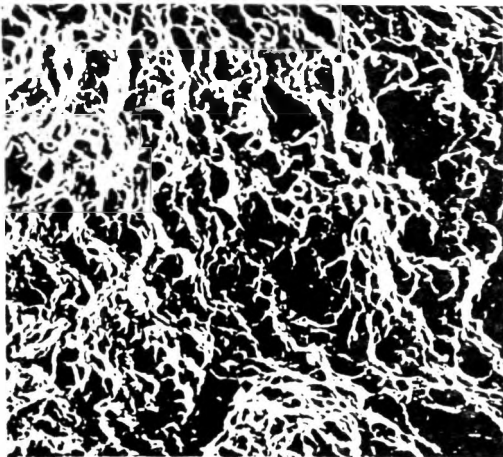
Scanning electron fractograph of fusion zone tensile sample after 650°C post-weld heat treatment (320X)
